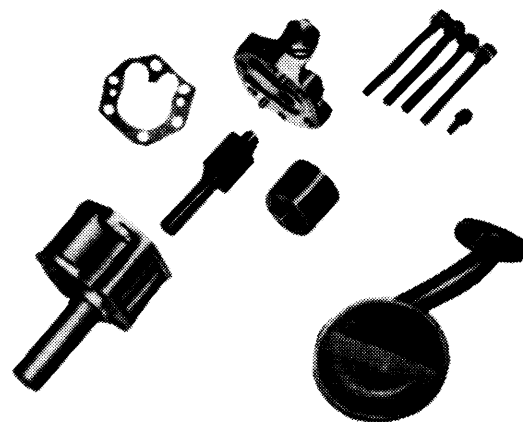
Exploded View of Oil Pump & Pickup Tube
